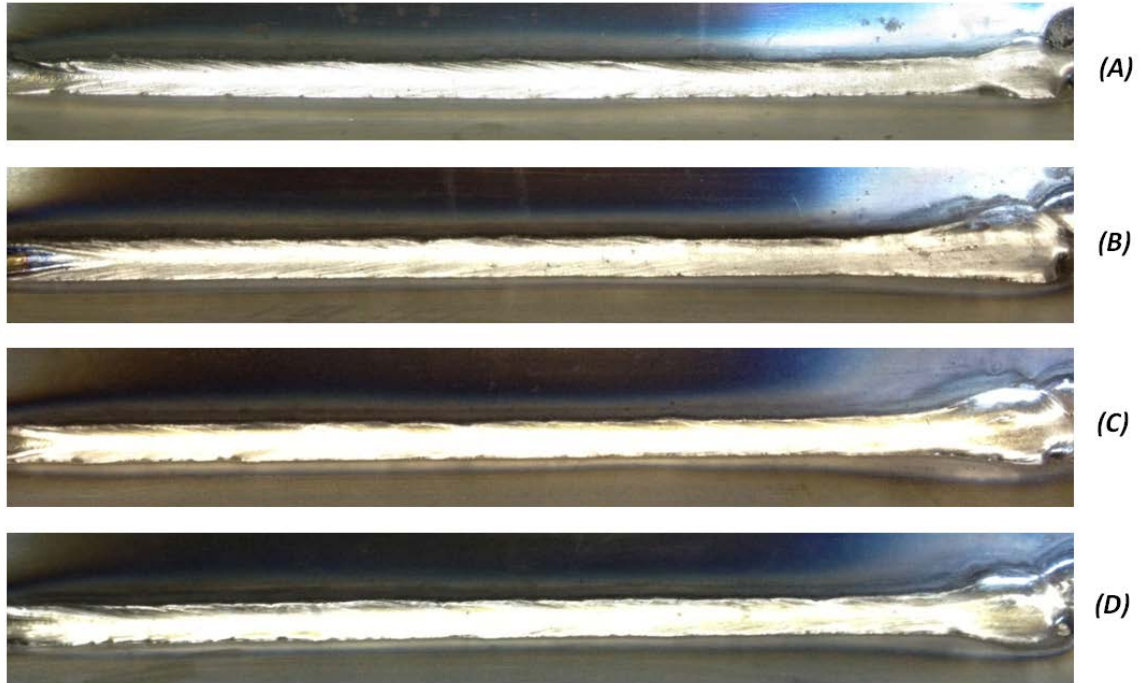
Weld Beads of Fillet Welding Experiments (Direction: R to L)
